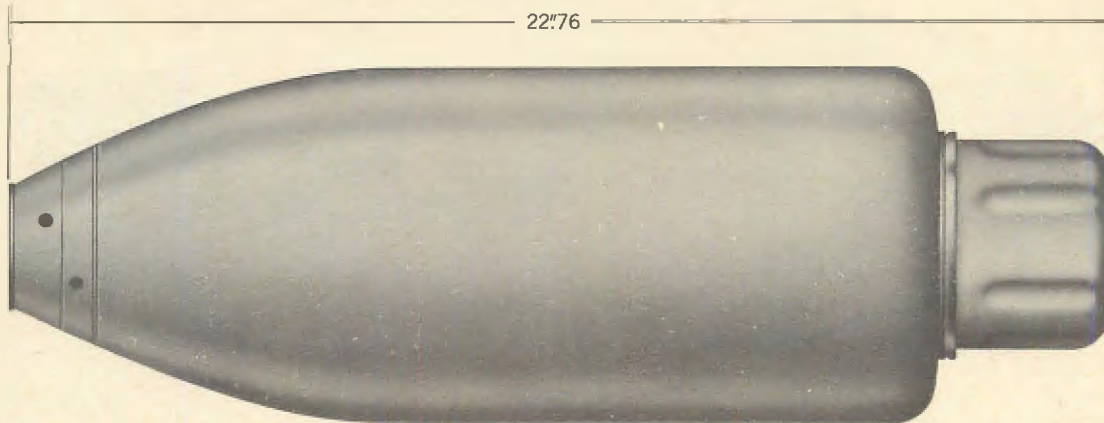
7.2-Inch Rocket Head Mk 5 Mod 0 (HE, ASW), External View.
